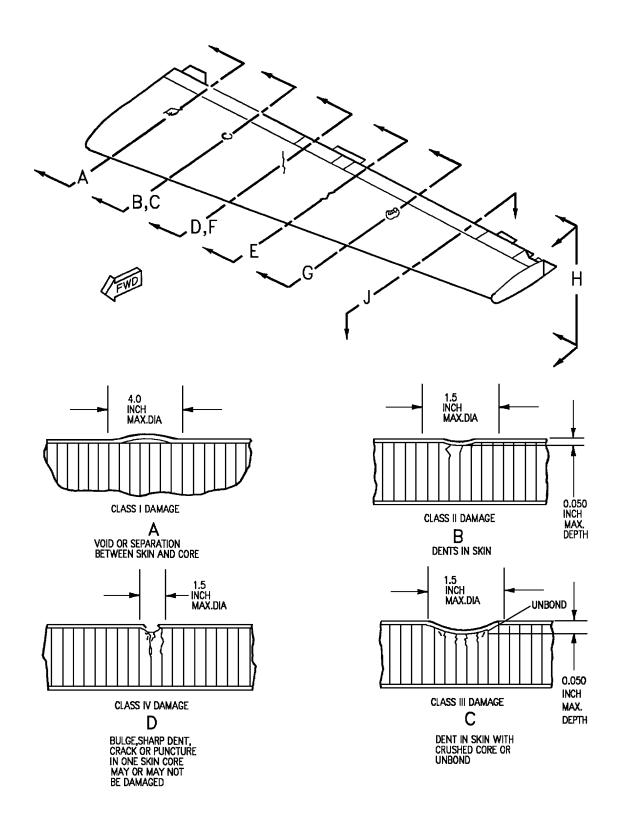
Repairable Damage, Aluminum Skin and Aluminum Honeycomb Core (Sheet 1)
